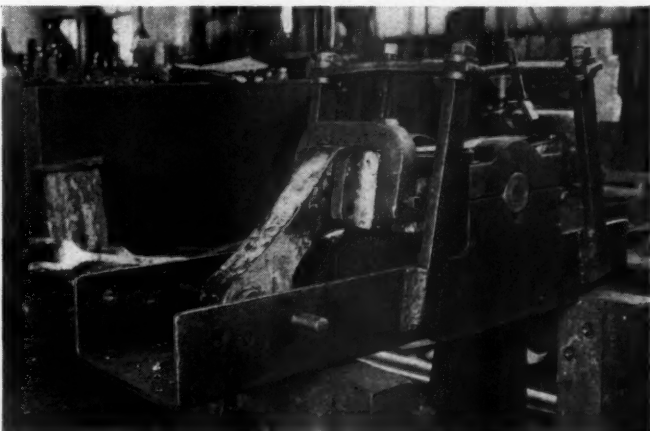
Link jig with link and link cheeks in position for reaming holes
